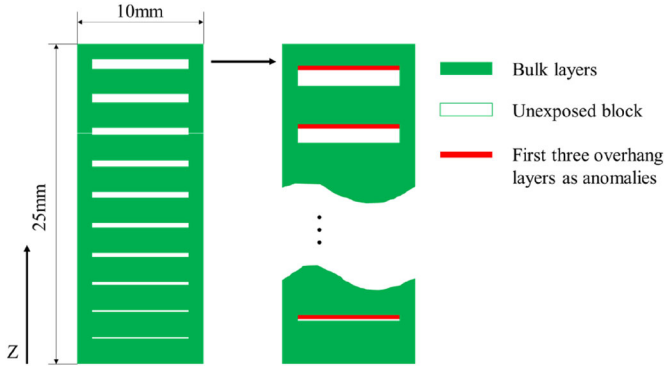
Schematic view of the additively manufactured specimens with unexposed blocks.
